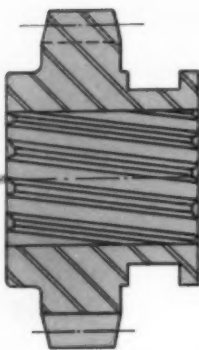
Improved design of sliding gear has added hub which locates teeth more centrally and reduces tendency of gear to tilt on shaft
